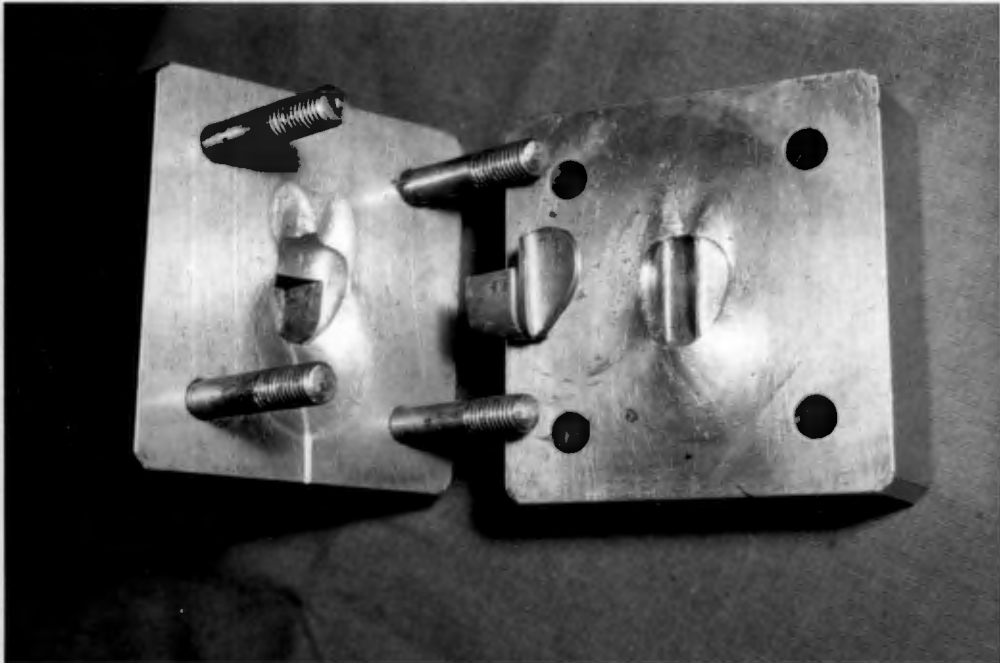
Three piece metal mould used for the manufacture of Silastic Valve V.
